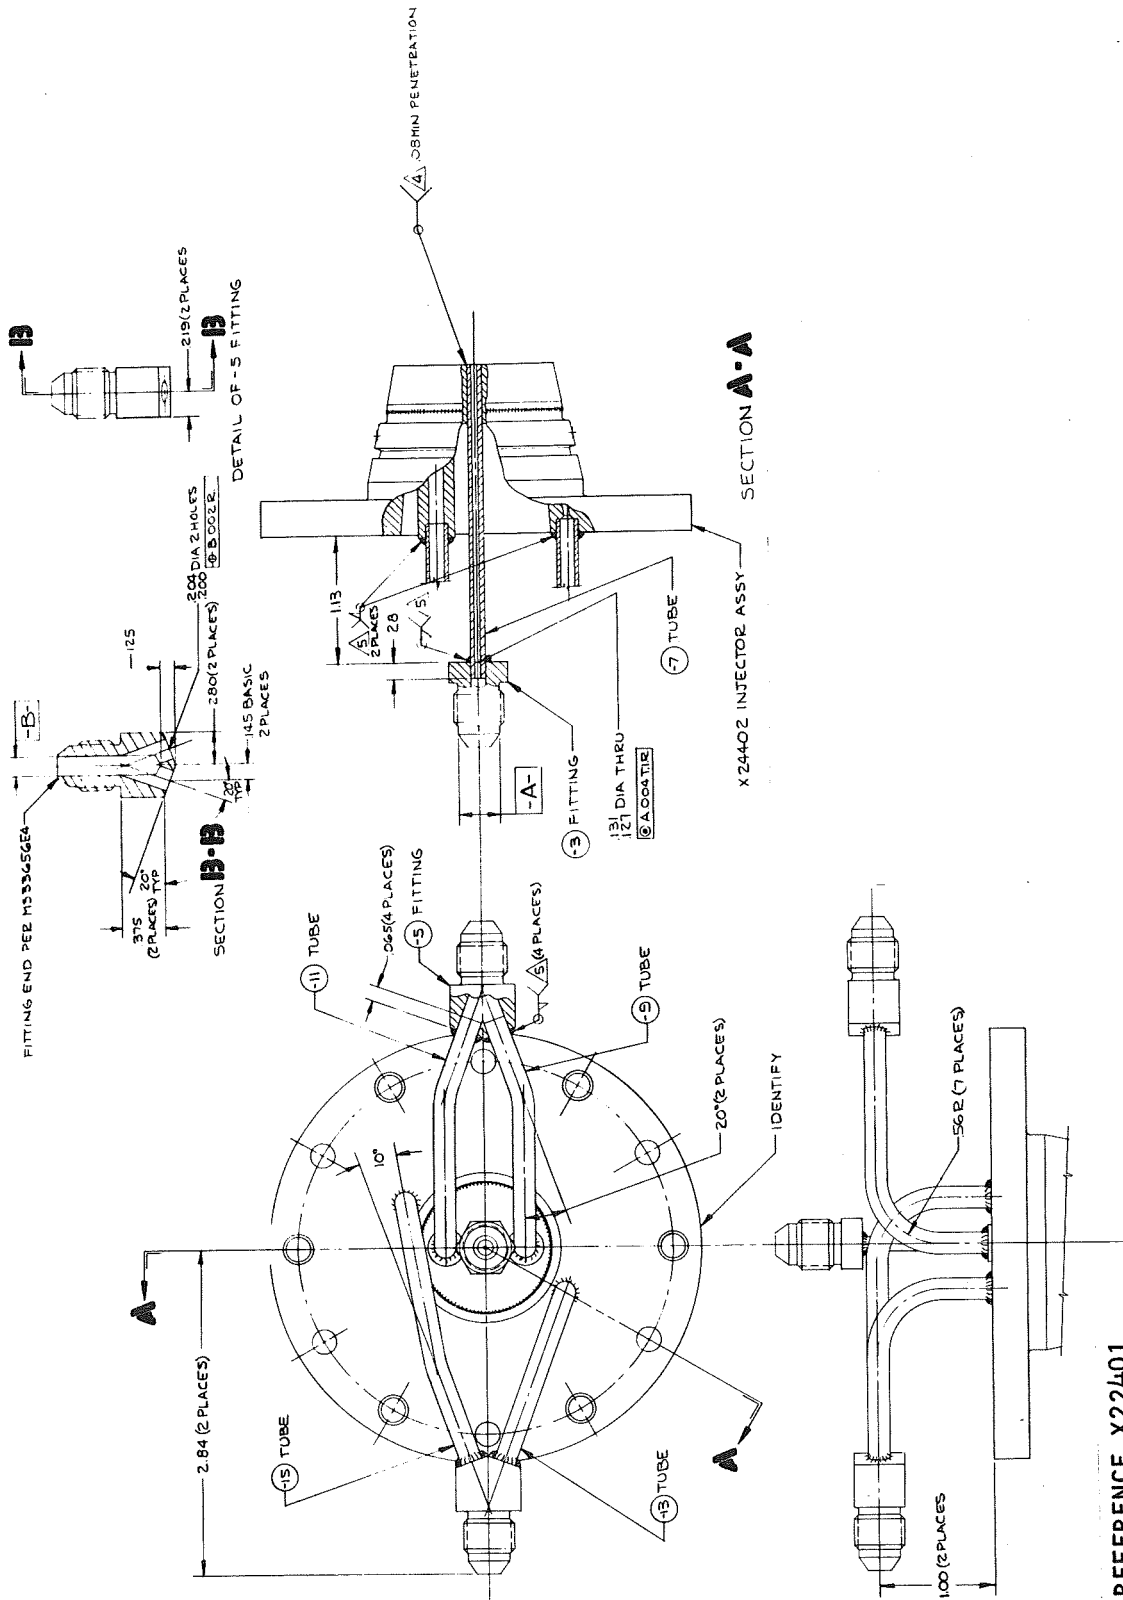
Assembly Drawing for the 100-pound Thrust FLOX/Methane Injector
